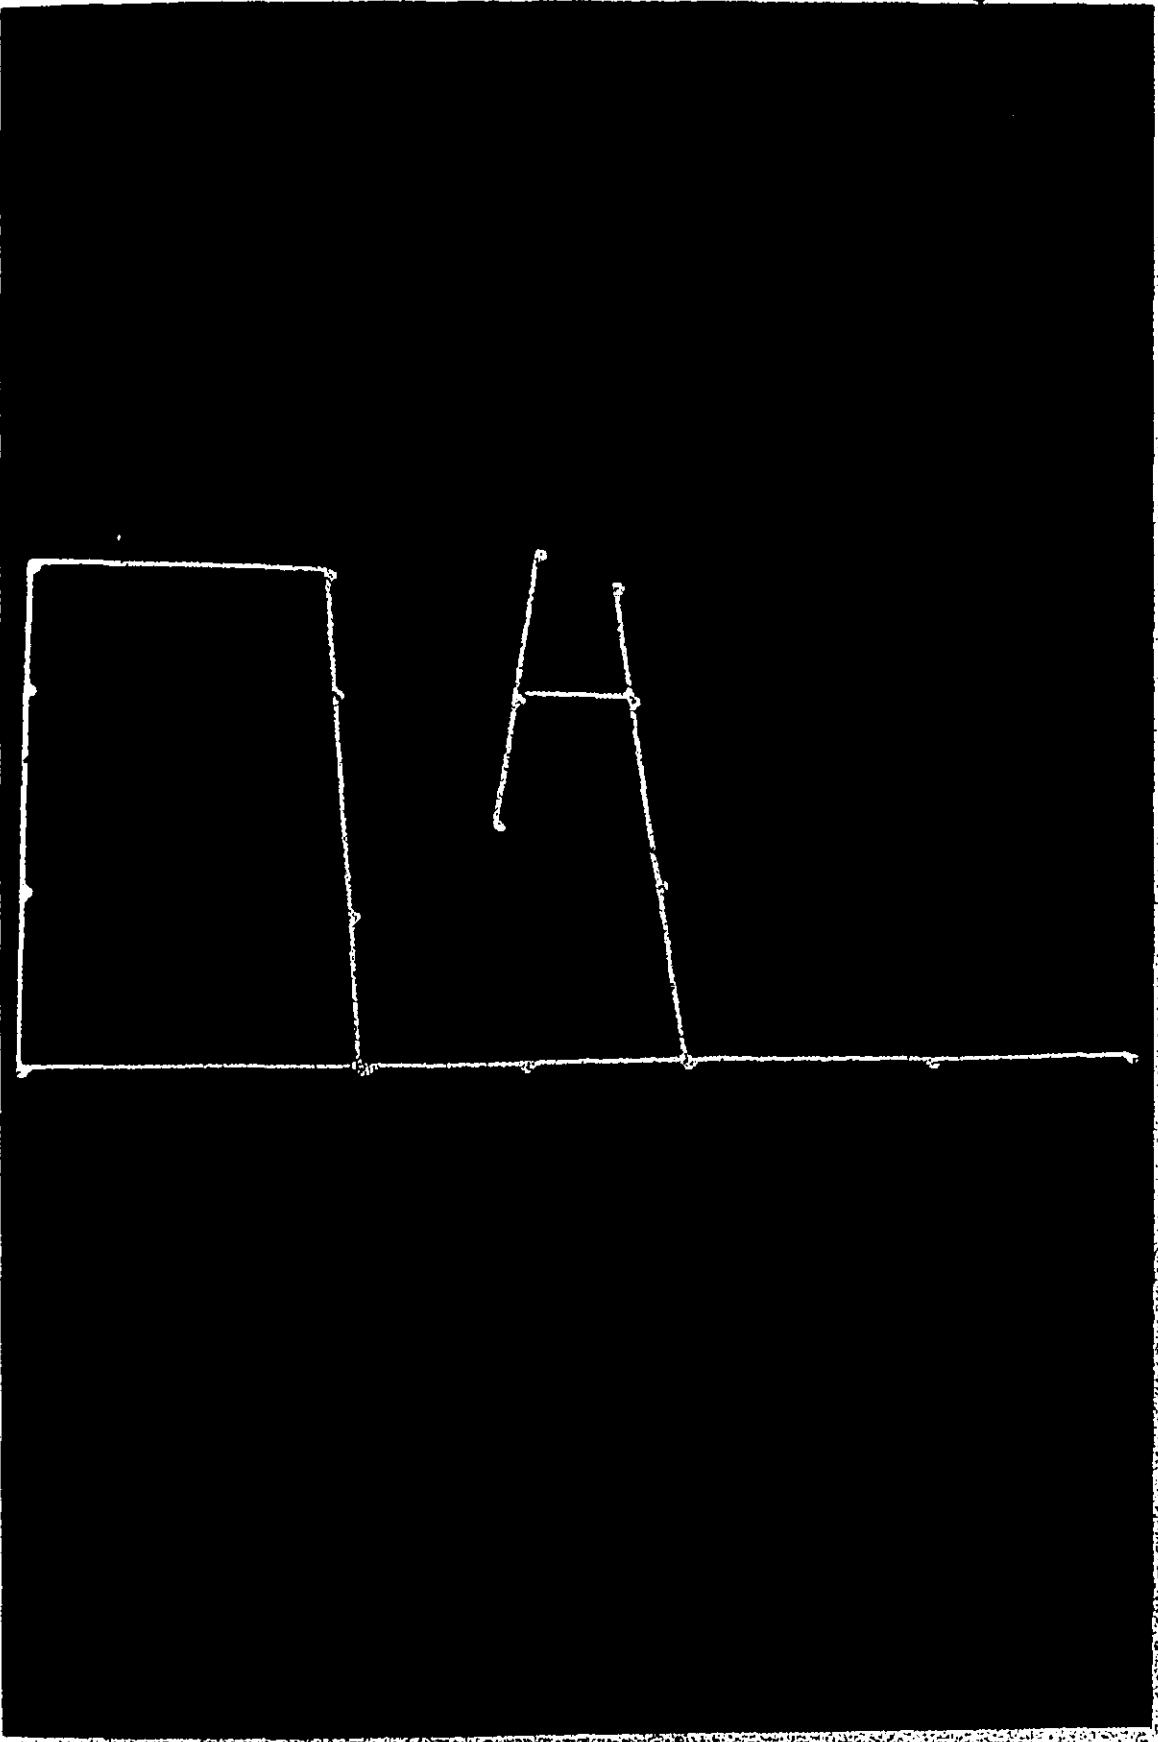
Perspective View of a Finite Element Model of a Milling Machine Photographed from CRT Display.
